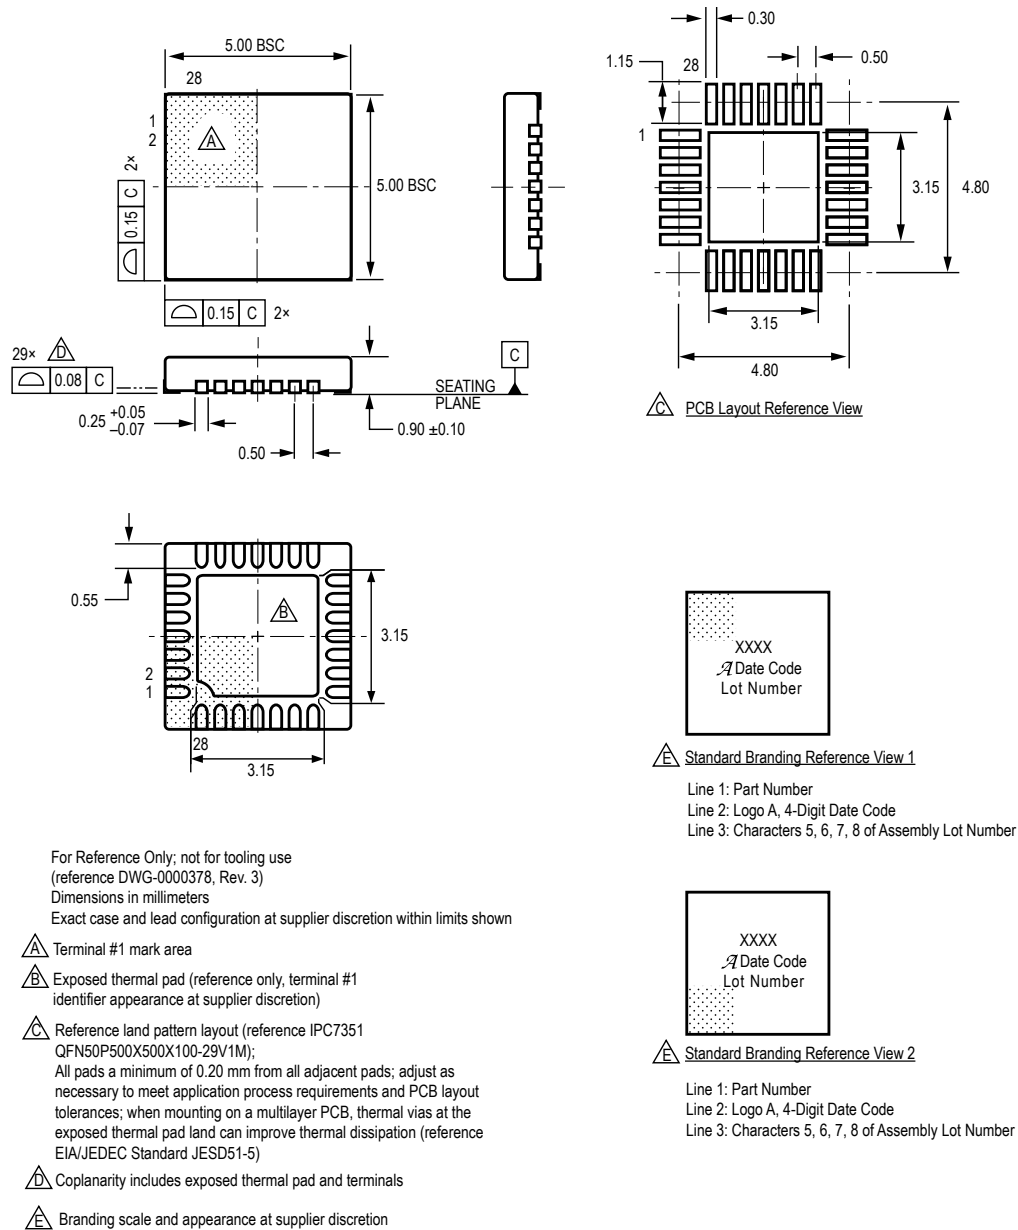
Package ET, 28-Contact QFN with Exposed Pad
